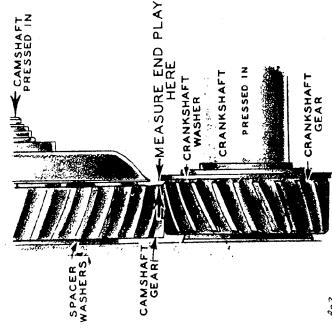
CHECKING CAMSHAFT GEAR ENDPLAY
